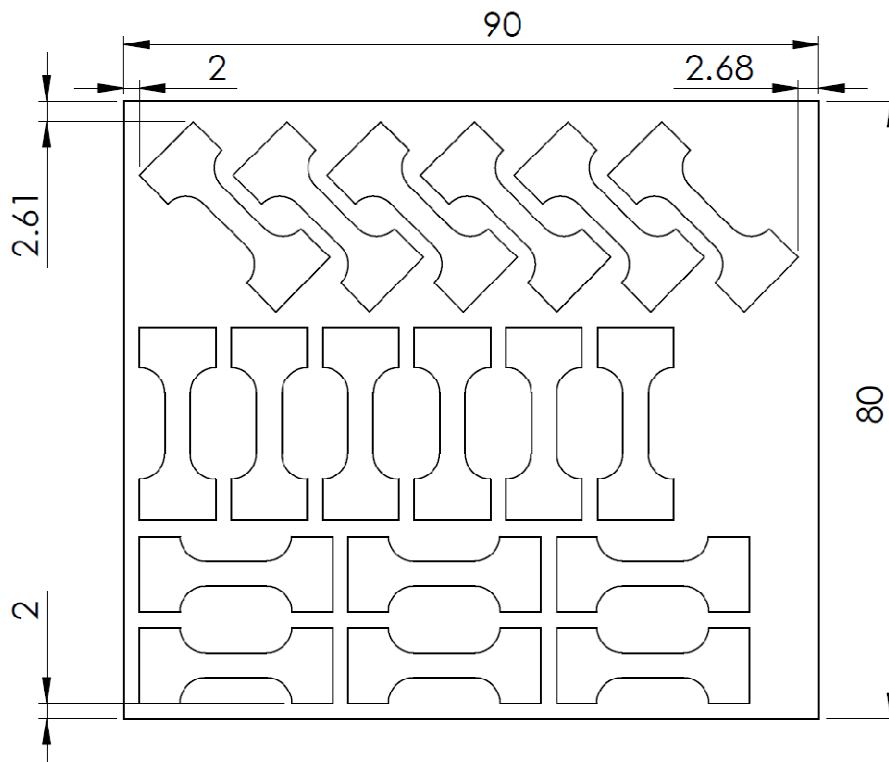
New Tensile Specimen Plate Layout. Dimensions are in Millimetres
